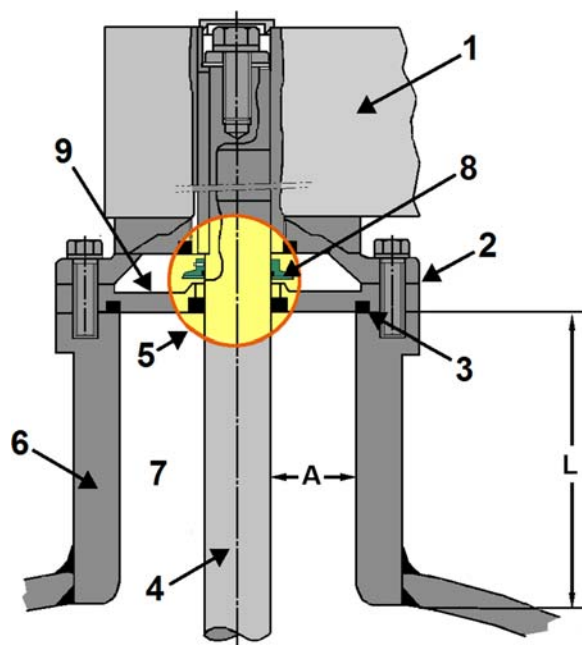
The top entering agitator with motor (1) is mounted to a vessel using a flanged or hygienic clamp connection (2), with hygienic O-rings or gaskets (3) to seal between the mating surfaces. A retained gasket having limited compression is more hygienic than an O-ring in the face for sealing the joint. The agitator shaft (4) passes through the mounting flange via a seal (5). The upstand (6) for the top mounting of the agitator should have limited length L because of the difficulty of cleaning the annular space (7) in-place. The annular space between the agitator shaft (4) and agitator nozzle (6) shall, for cleaning purposes, have the target maximum L/A ratio of 2:1. Agitator motors (1) should be equipped with permanently lubricated bearings. Where lubrication is required, the design and construction shall be such that lubrication cannot leak, drip, or be forced into the product zone. Self-lubricating agitator shaft (packing) seals (8) shall be provided with convenient means for adjustment to prevent leakage and to allow for complete drainage to the exterior. In that way, accumulations of foreign material in the event that leakage does occur can be avoided. Further, a drip protection plate (9) can be provided to prevent lubricant from entering the product zone (Moerman and Kastelein, 2014).
